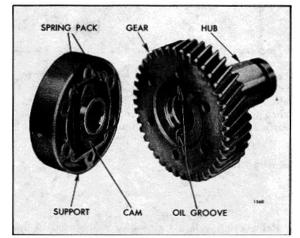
Relation of Blower Drive Cam to Oil Grooves in Gear Hub
